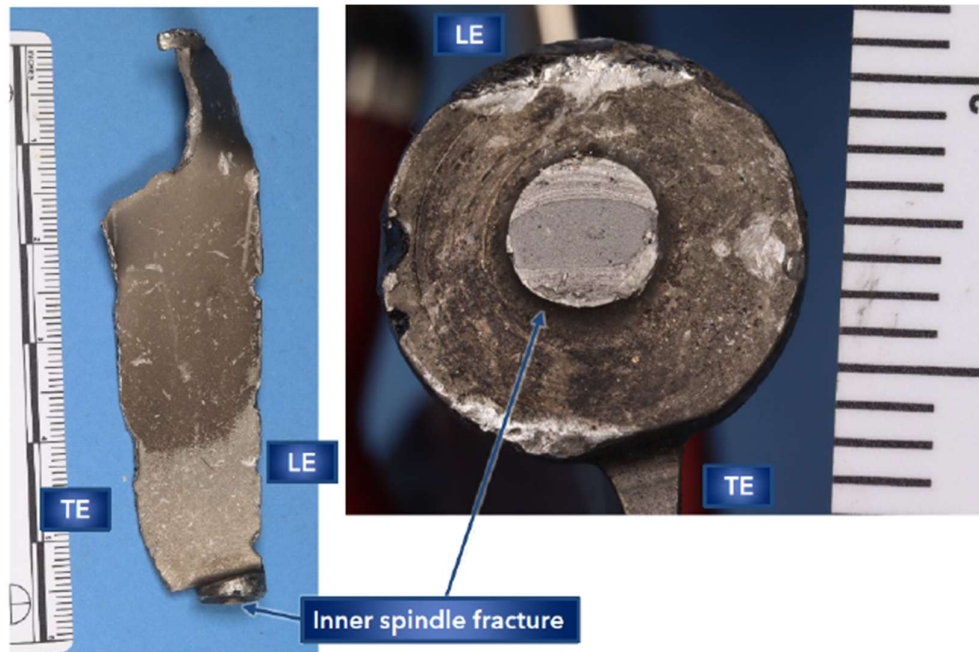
VIGV piece recovered from the fan case (left image). The inner spindle fracture surface (right image).
